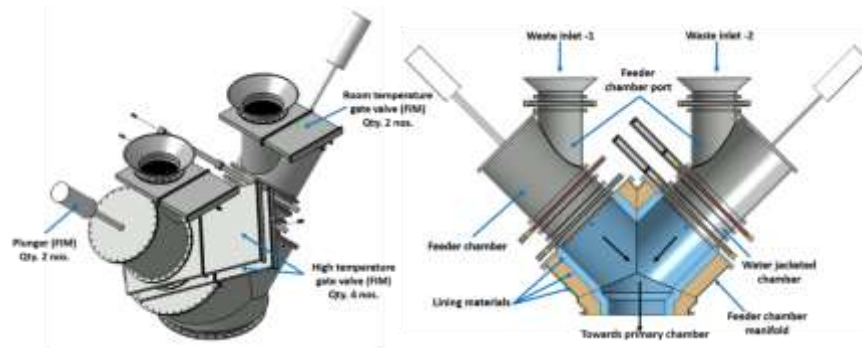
Waste feeder chamber assembly (Isometric view and sectional view)
